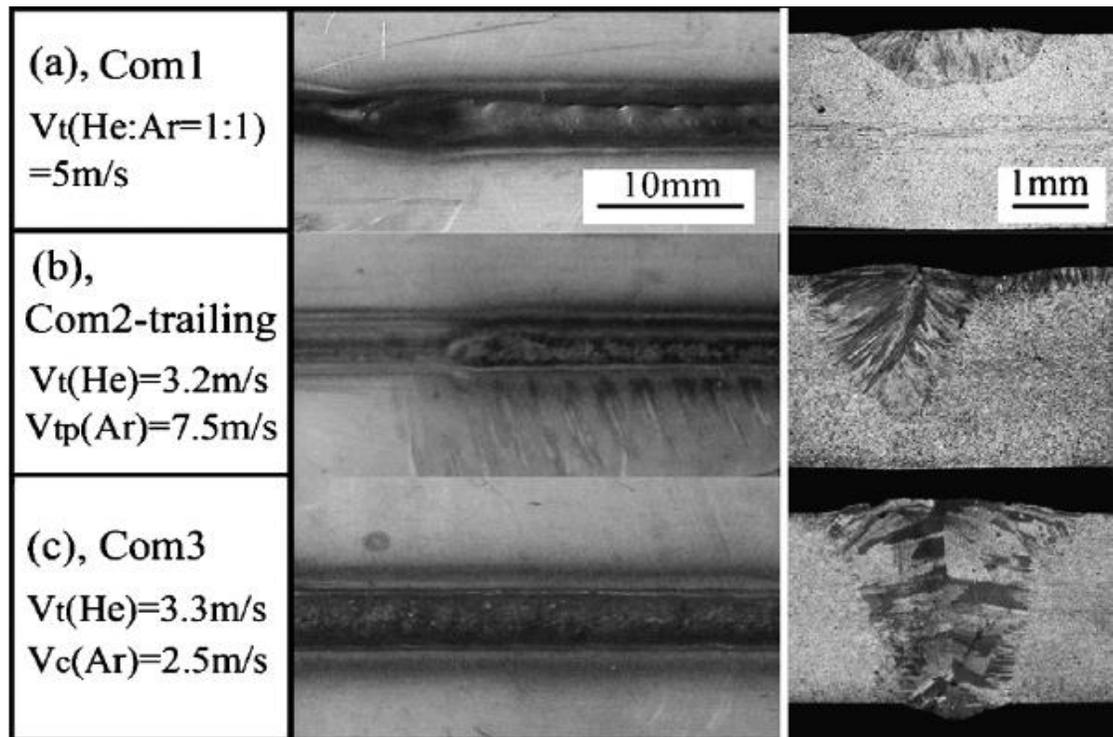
Surface and cross-section morphology of weld using different shielding gas parameters [133]
